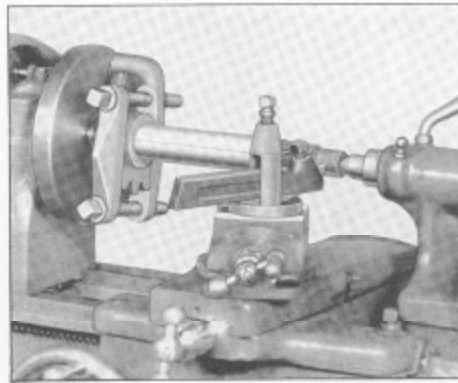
Cutting a Screw Thread on the End of a Shaft.
